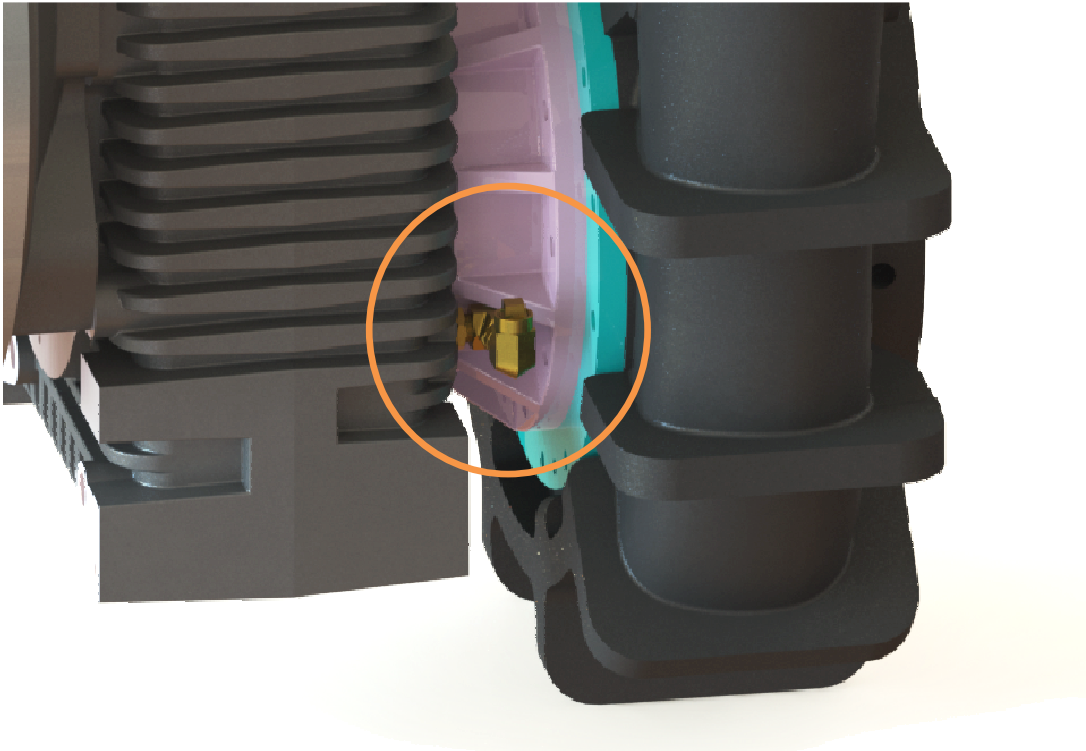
Oil Fill Level Assembly - Factory Install Check (brass color shown for clarity)
